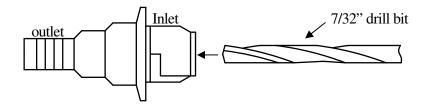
To remove ball and spring from bottom of check valve use 7/32" drill bit
